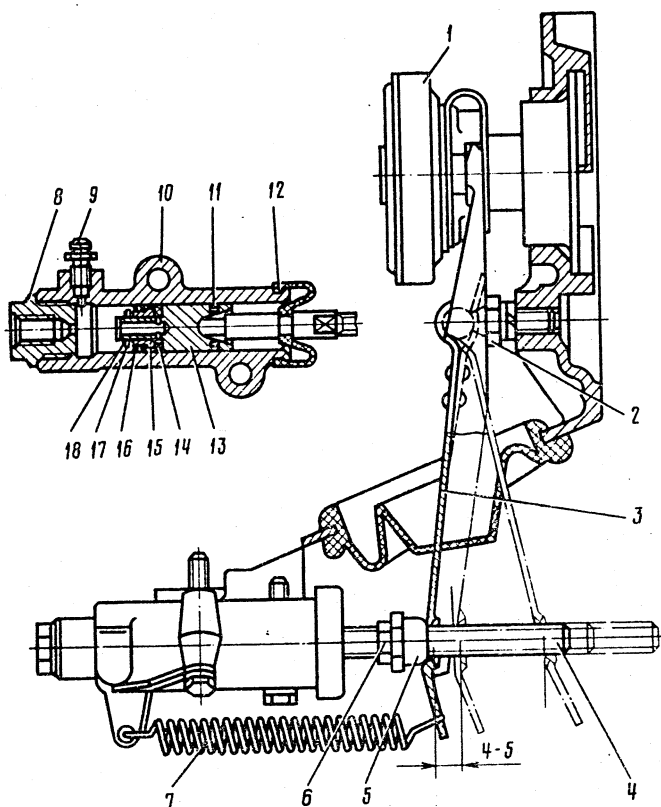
Clutch Operating Cylinder and Release Yoke:
